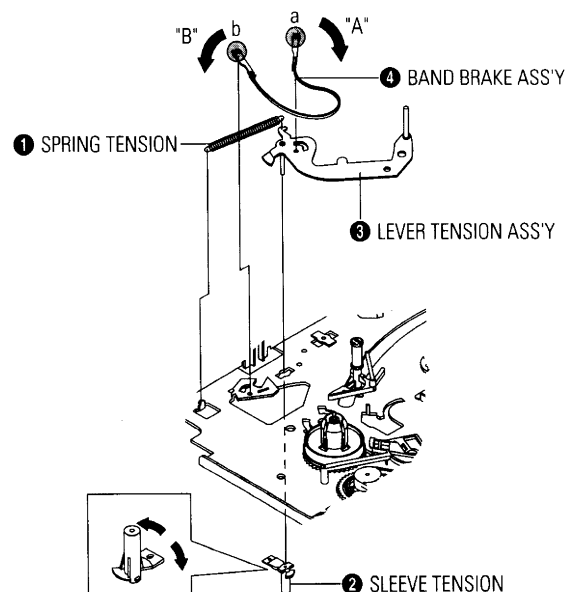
Lever Tension Ass'y, Band Brake Ass'y, Sleeve Tension Removal
